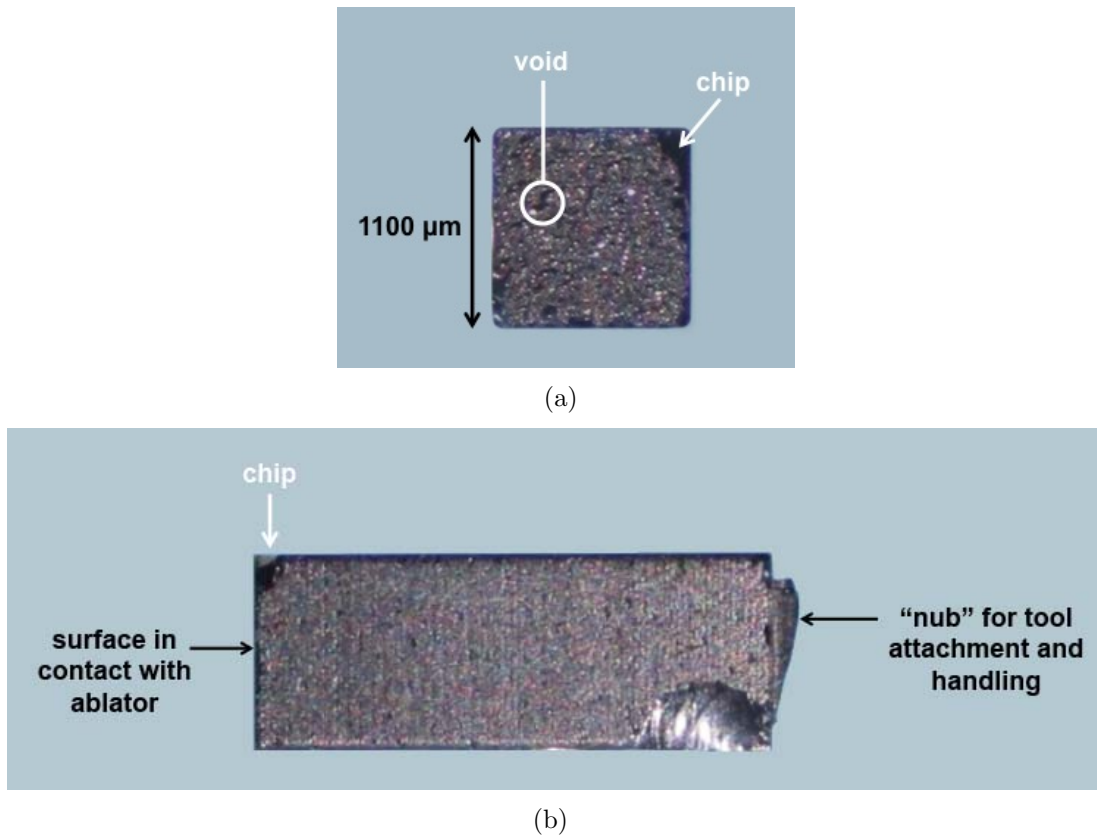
Example of machined CRF foam (0.38 g/cm^3), prior to insertion into the shock tube. (a) End-view (surface in contact with the ablator); (b) Side-view. Machining and handling of the material introduce large-scale chips and voids (visible in both the end- and side-views). The machining process also introduces periodic tool marks (visible in the side view). On the far end, the “nub” is an intentional design feature to facilitate tool attachment and handling. The large chip near the nub was accidental, but inconsequential because the shock front will not travel that far down the tube at the latest observation time in the experiment.
